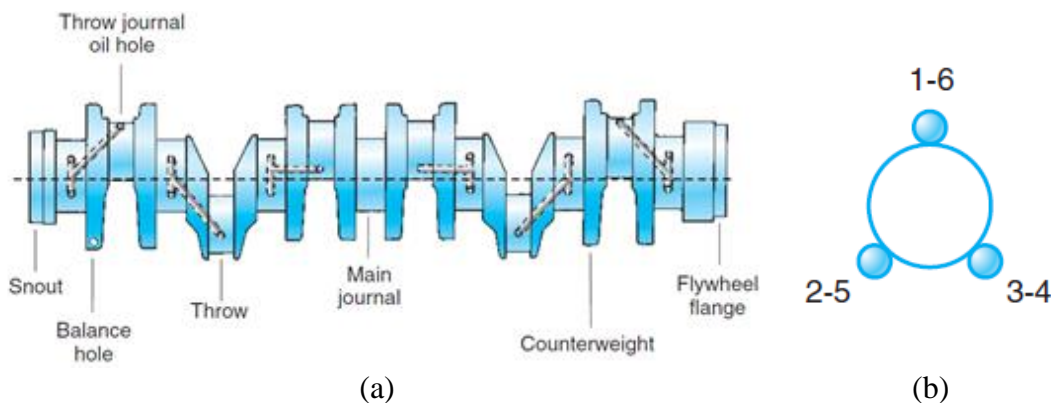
(a) Schematic showing crankshaft and its nomenclature and (b) Schematic showing the crank throw configuration for 6 – cylinder engine [Bennett, 2010]
